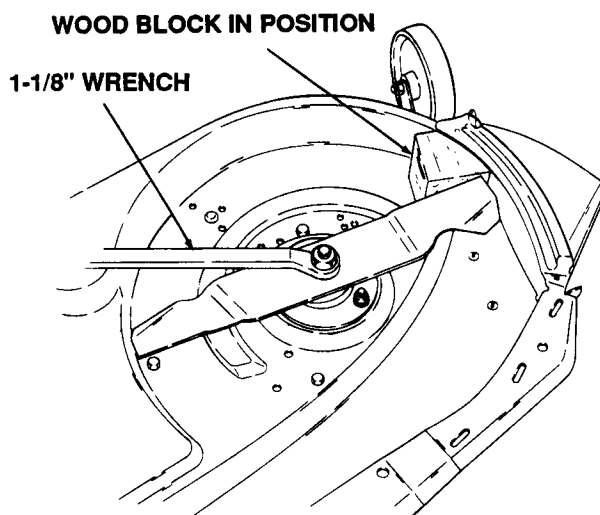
Loosen Hex Nut Securing Cutting Blade.
